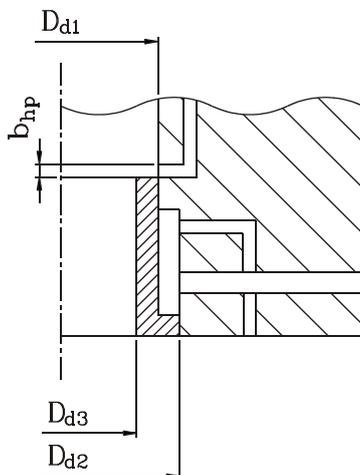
Schematic drawing of the distributor ready to leave its bottom dead centre
